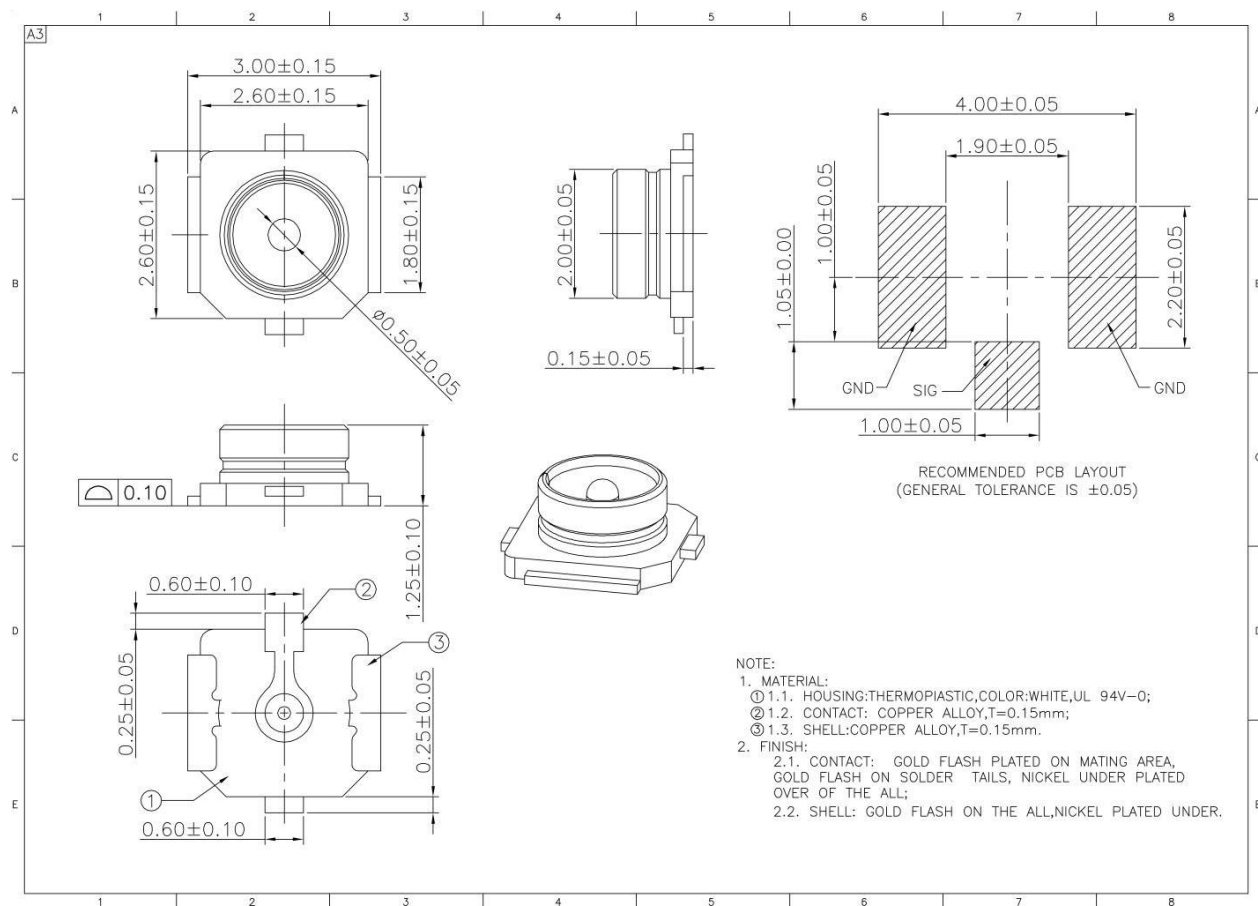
External Antenna Connector Dimensions (Unit: mm)
